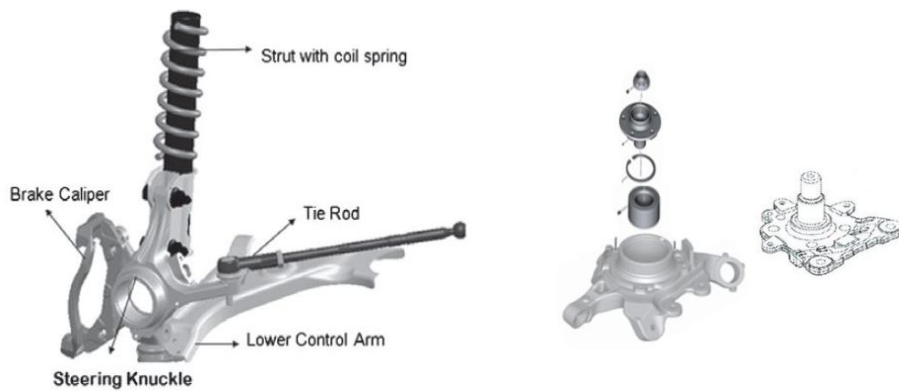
Assembly scheme of knuckle on suspension system (left) steering knuckle exploded view (right)
